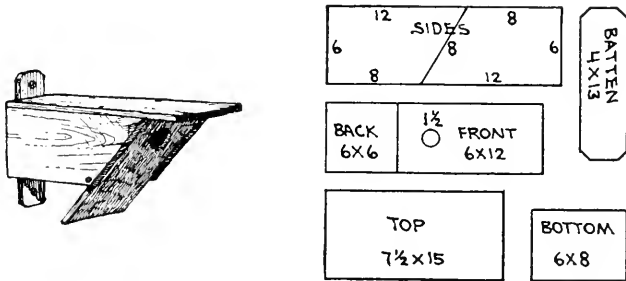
Swallow box, supposed to be cat-proof, and details of construction.
